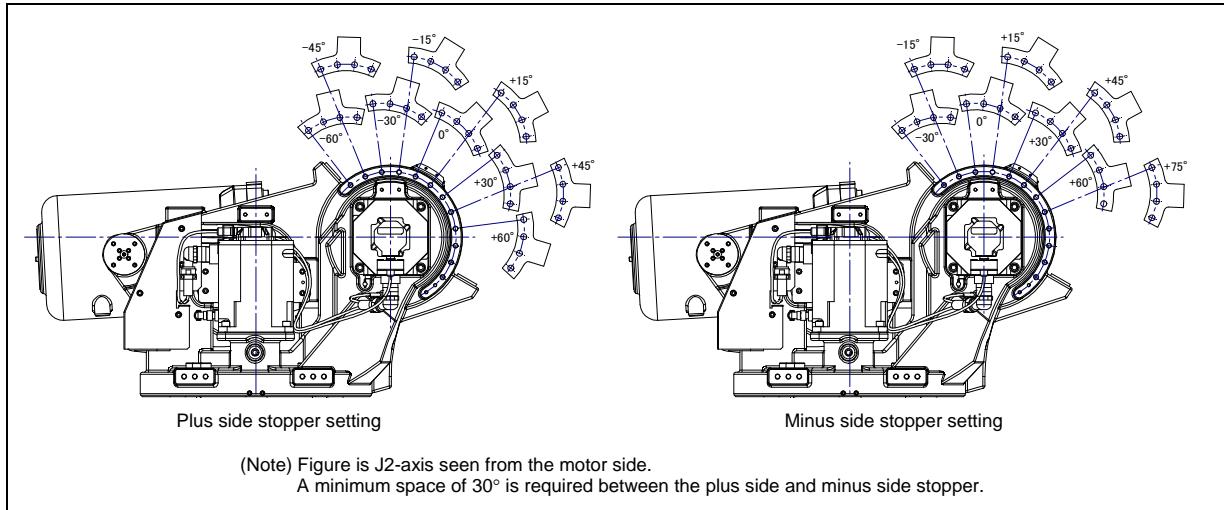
(j) Mounting the J2-axis adjustable mechanical stopper (2/2)
